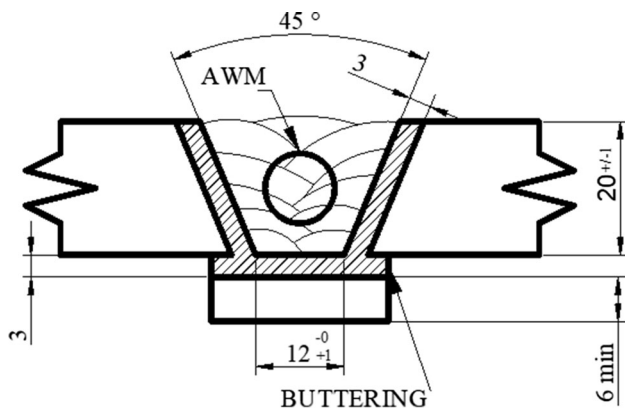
ANSI/AWS A5.29/A5.29M:2010 coupon transversal cut. Dimensions in mm
